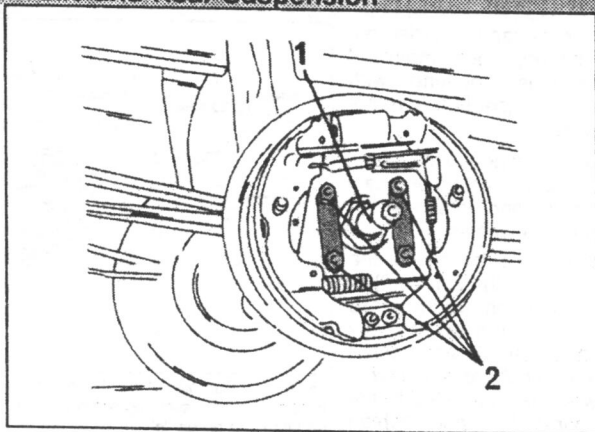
View of the brake back plate without brake drum. The axle stump (1) is secured with four bolts (2), but note the different diameter which can be found.
